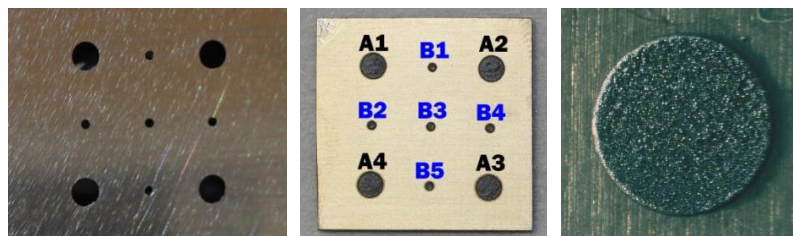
Stainless steel template (left), printed testing sample (middle), detail of printed dot (right)
